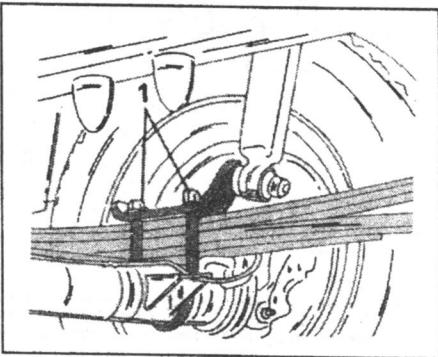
Attachment of a rear spring to the rear axle tube. The nuts (1) are secured by lock plates. Always replace the latter.
